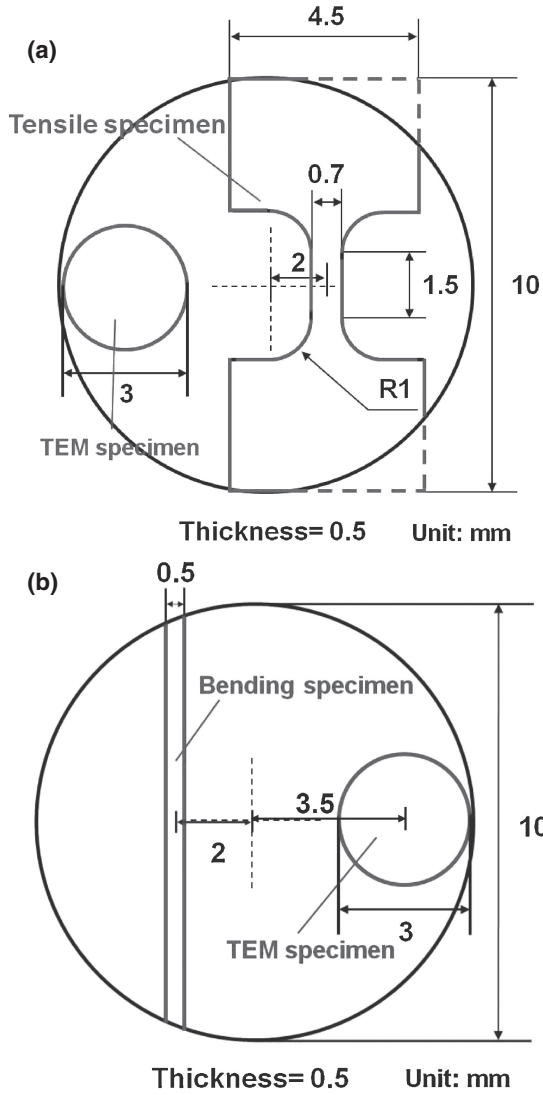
Dimensions of disk sample including positions for TEM disks and (a) tensile specimen and (b) bending specimen.
